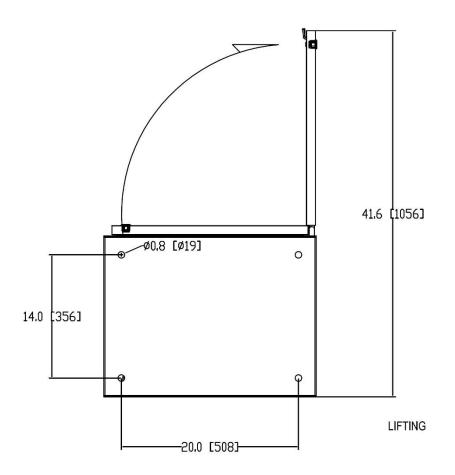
Bottom Dimensions, no Customer I/O Panel (Enclosed)
